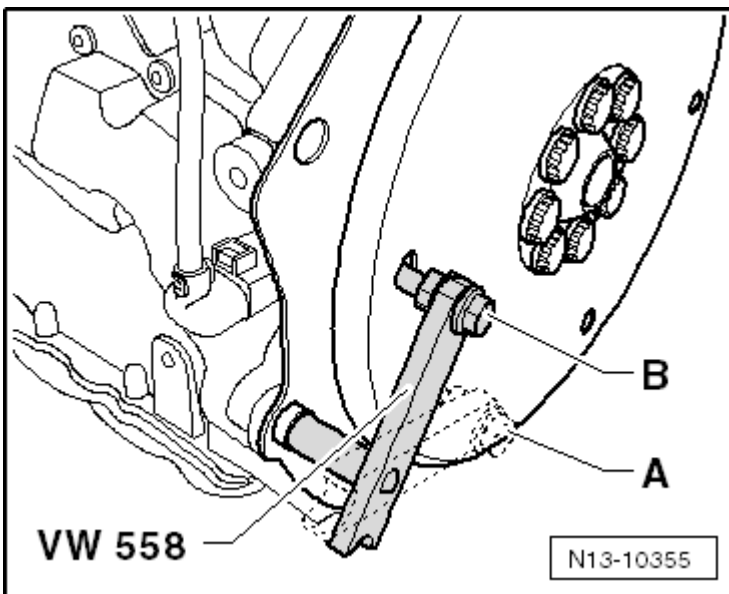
Identifying Flywheel Lock Adapter -VW 558- Installed To Cylinder Block And Drive Plate
